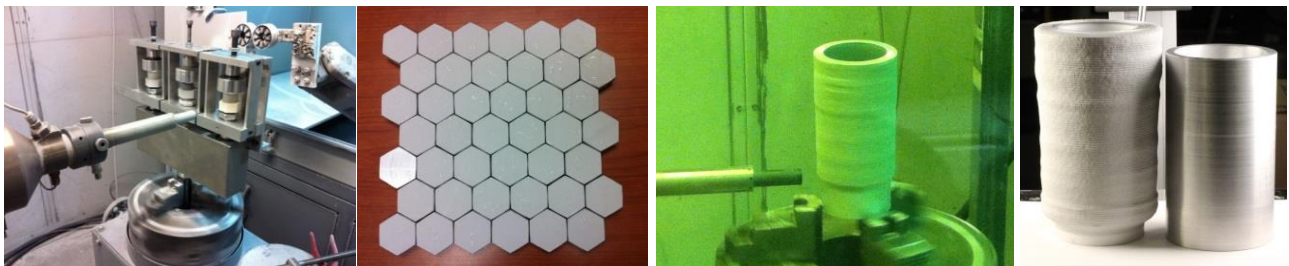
Cold-spray equipment, NRC in-house developed fixture for coating hexagonal ceramic tiles and metal encapsulated tiles (left); metal casings machined from cold-sprayed coatings (right).
